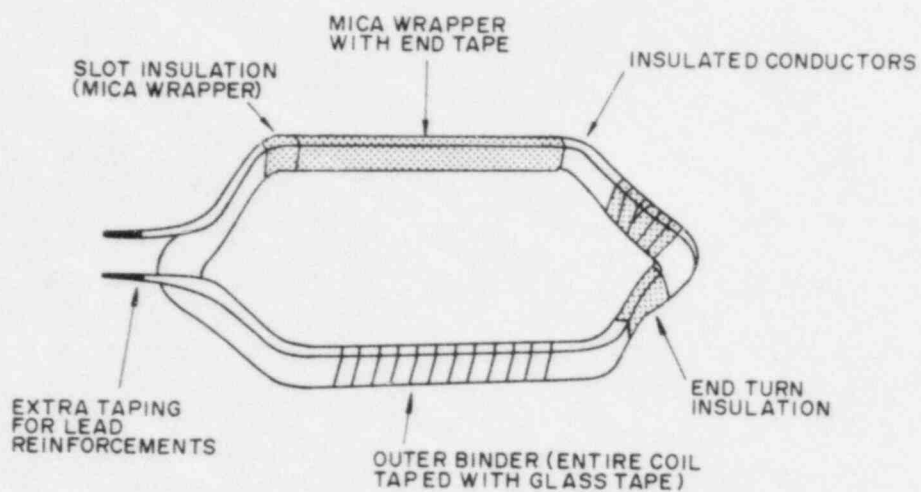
Typical Insulation Construction for a Form-Wound Coil (Ref. 18)
